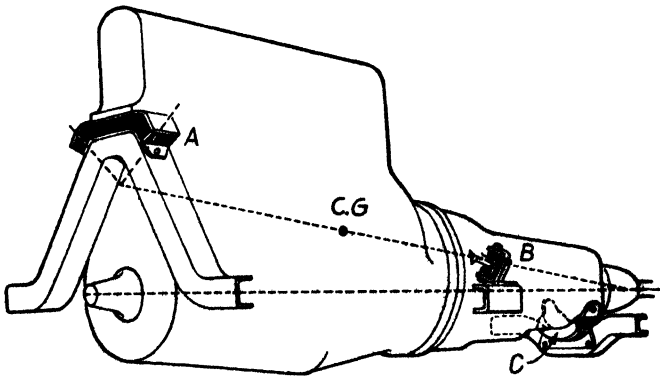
CHRYSLER "FLOATING POWER" METHOD OF ENGINE MOUNTING
